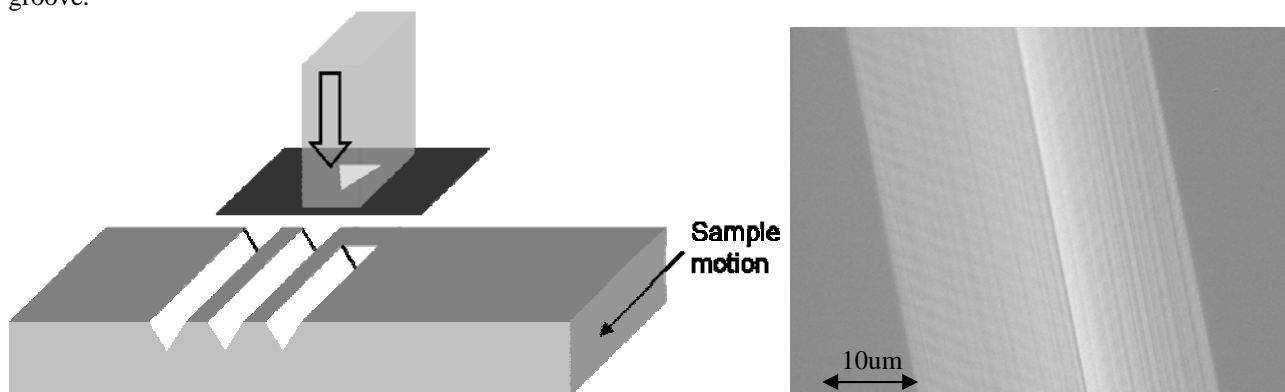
Workpiece dragging method for producing 1D structures. Uniform illumination of a triangular aperture causes more material to be removed towards the centre of the groove.
